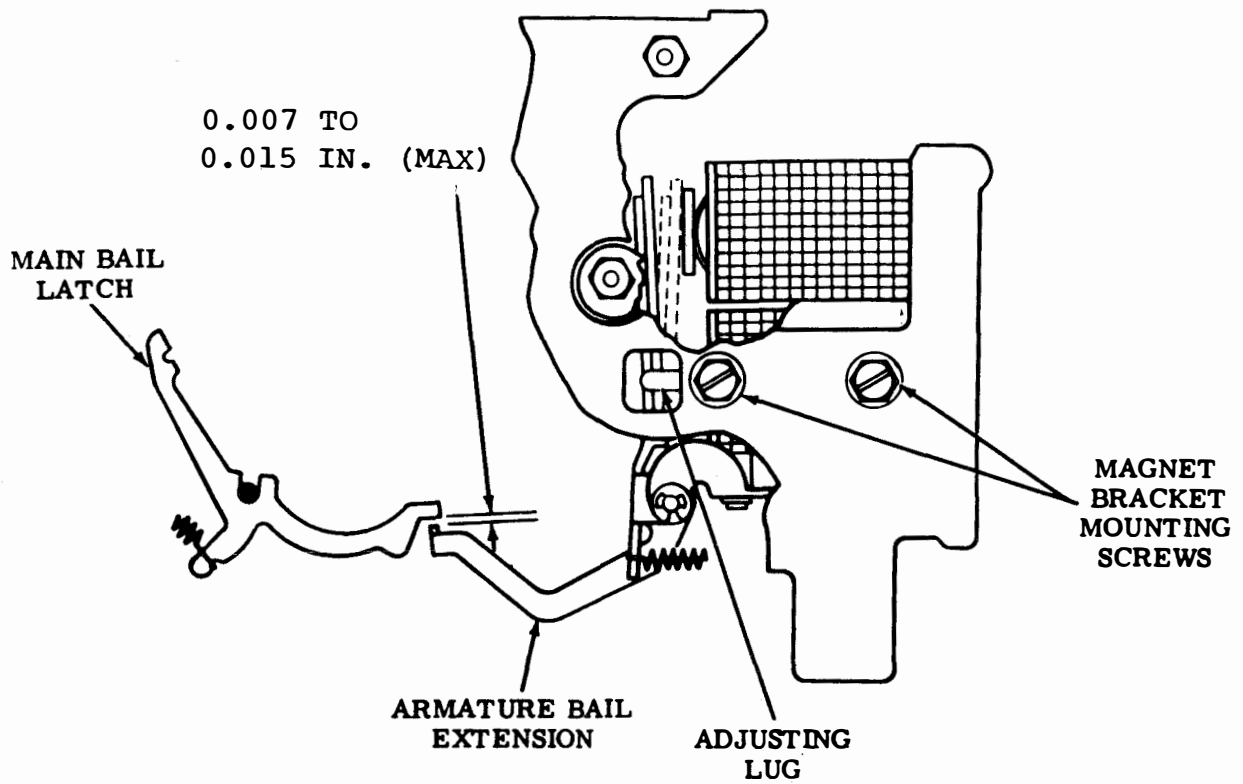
Clutch Magnet Assembly (Preliminary - Main Bail Latch/Armature Bail Extension Clearance, Rear View)
